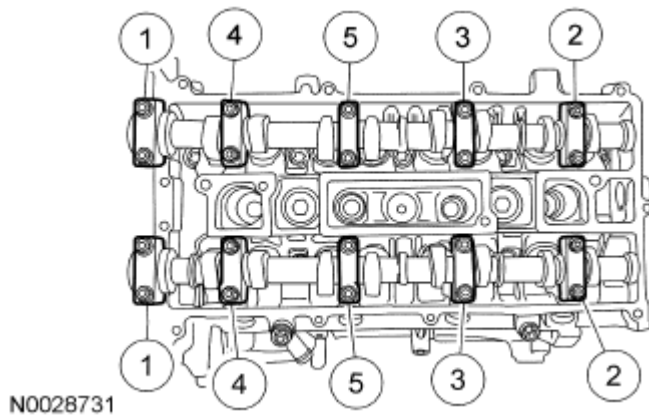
Identifying Camshaft Bearing Cap Bolts Loosening Sequence
